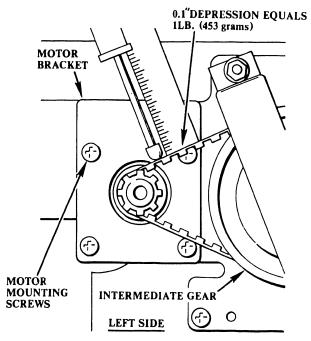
PAPER MOVEMENT GEAR BELT ADJUSTMENT
